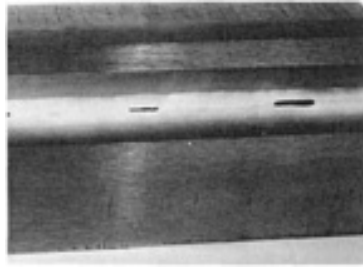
SURFACE CRACKS IN A FLUX-CORED ARC WELD HIGHLIGHTED BY DYE PENETRANT INSPECTION
